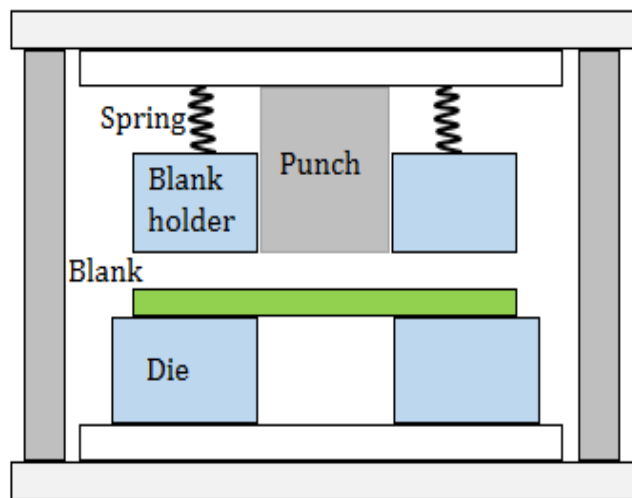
Schematic of blank material in general purpose die (punch die set) which is installed in the universal tension and compression testing machine for the punching experiments with the various punch-die clearances.
